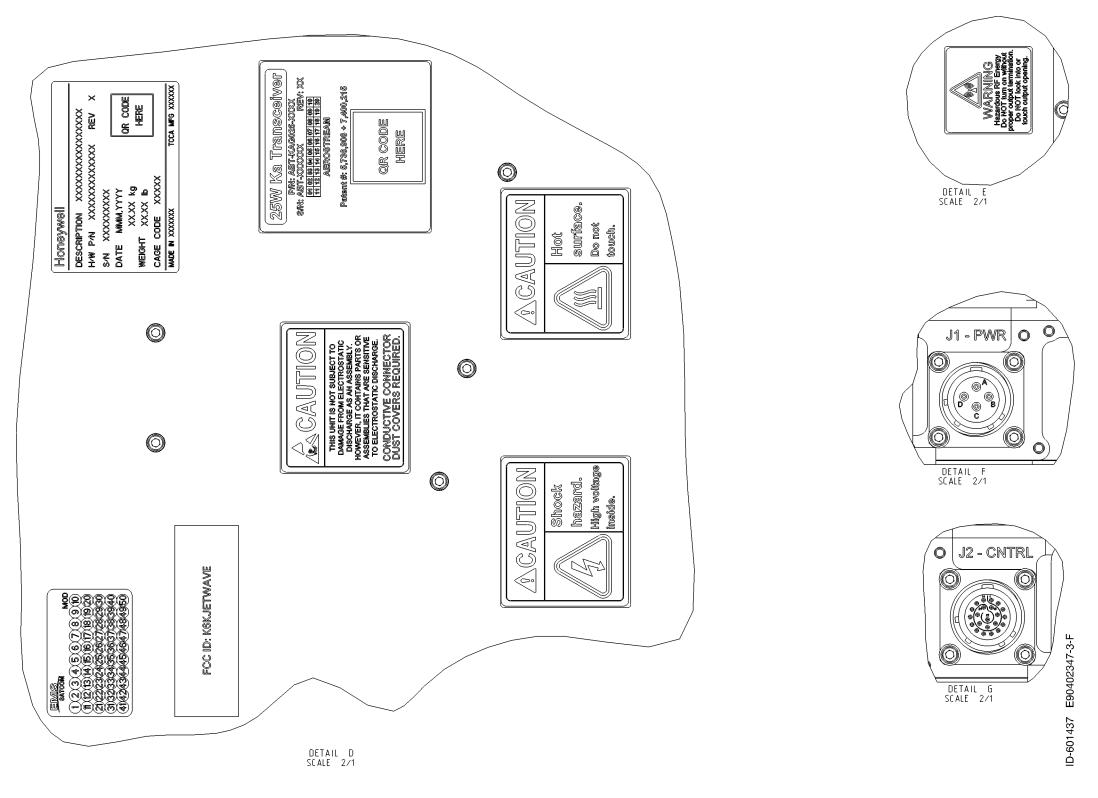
(Sheet 3 of 3) KRFU, Conduction-Cooled 2, Outline and Installation Drawing (90402347, REV F)
